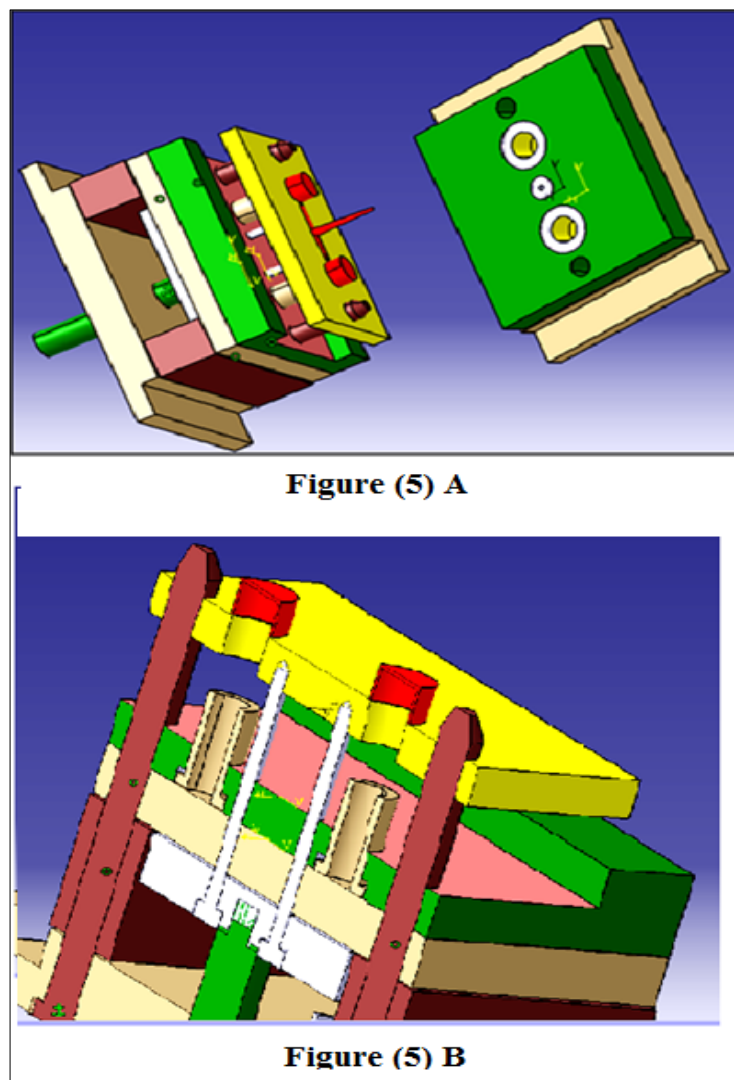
(A) Illustrate mould assembly in (3D) model, (B) Cross section of mould assembly in (3D).
